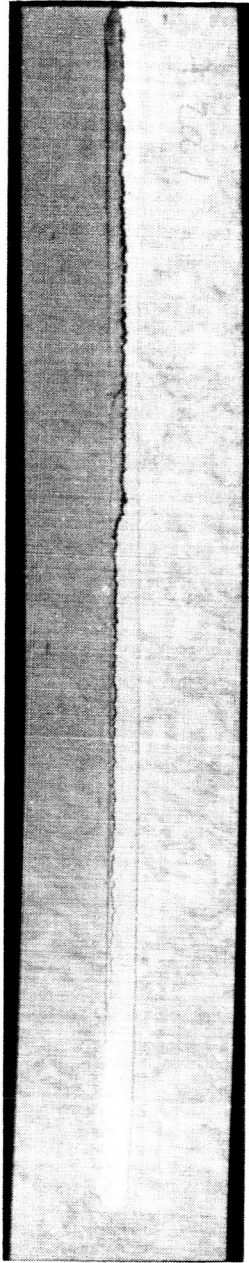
Typical Hot Tear on Bead-on-Plate GTA Weld on 0.030 Inch Arc Cast W-25Re-30Mo Alloy Sheet
